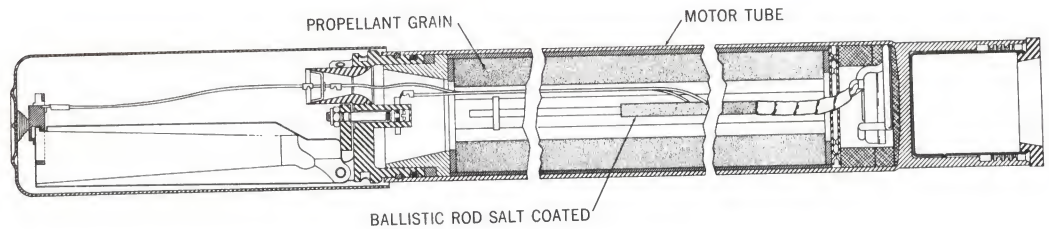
2.75-Inch Rocket Motor Mk 40 Mod 1, Sectional View.
